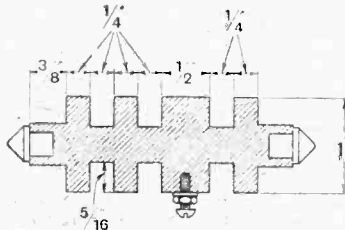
Details of the resistance coil former, mounting and terminal strip.
